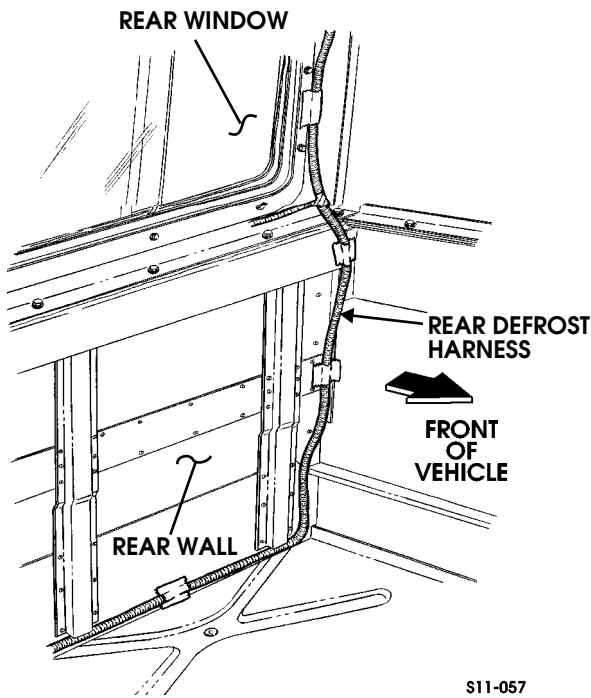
Rear Defrost Harness - Two Passenger Vehicle
